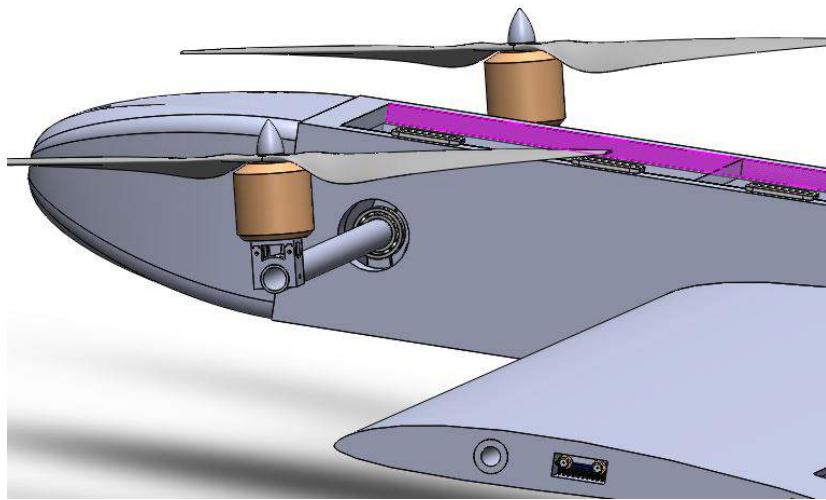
Front of the plane, showing the location of the bearings as well as carbon fiber tiltrotor bar.
